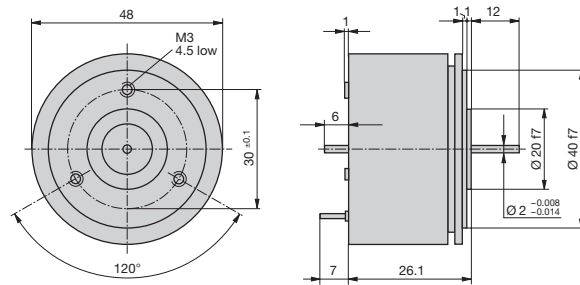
KINAX 3W2 with special drive shaft at front and at rear. At front: \varnothing 2 mm, length 12 mm. At rear: \varnothing 2 mm, length 6 mm.
